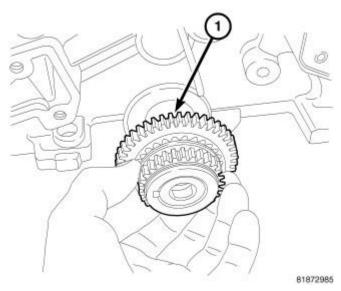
Crankshaft Sprocket Courtesy of CHRYSLER GROUP, LLC
